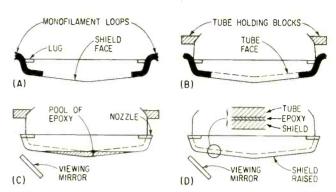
Fixture provides space between tube and shield. After bonding resin is inserted, shield is raised to complete lamination
